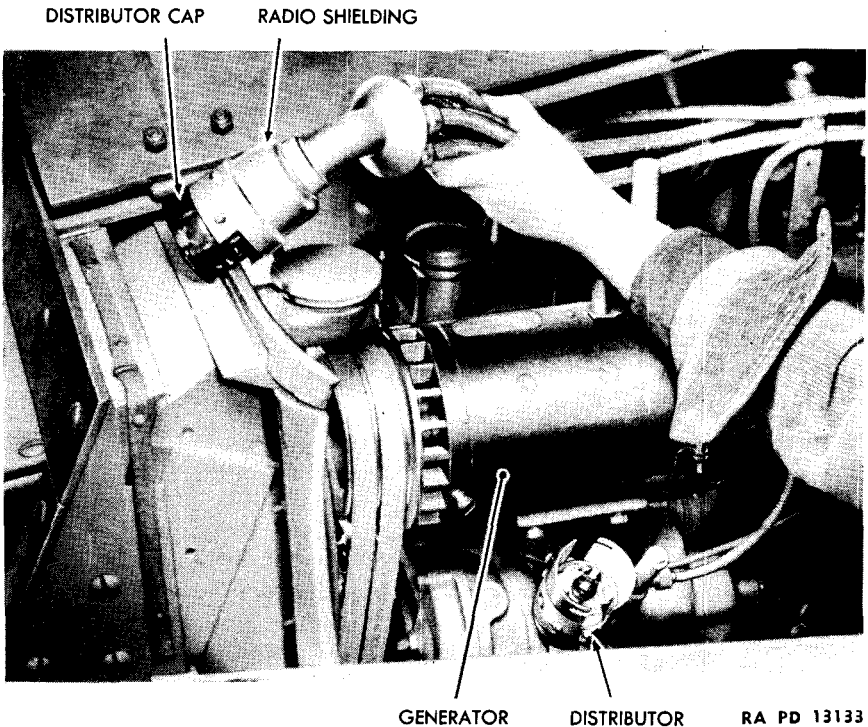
Removing Distributor Cap and Radio Shielding - (Gasoline Engine)
